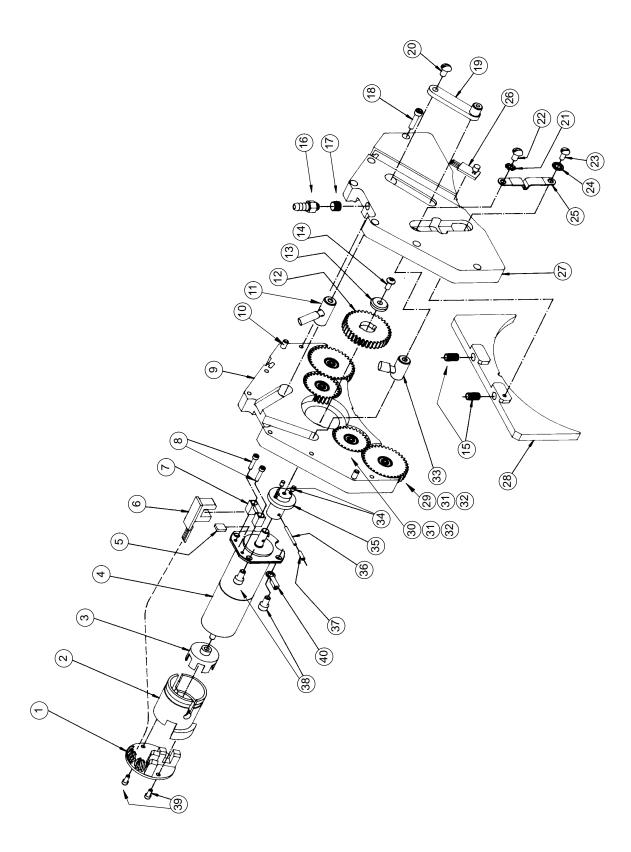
SWS-20H-B Motor and Power Block Assembly
